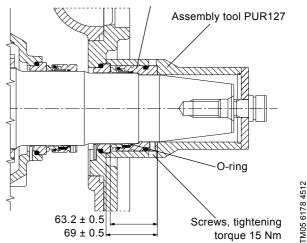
Fitting the rotating part of primary shaft seal, range 74
